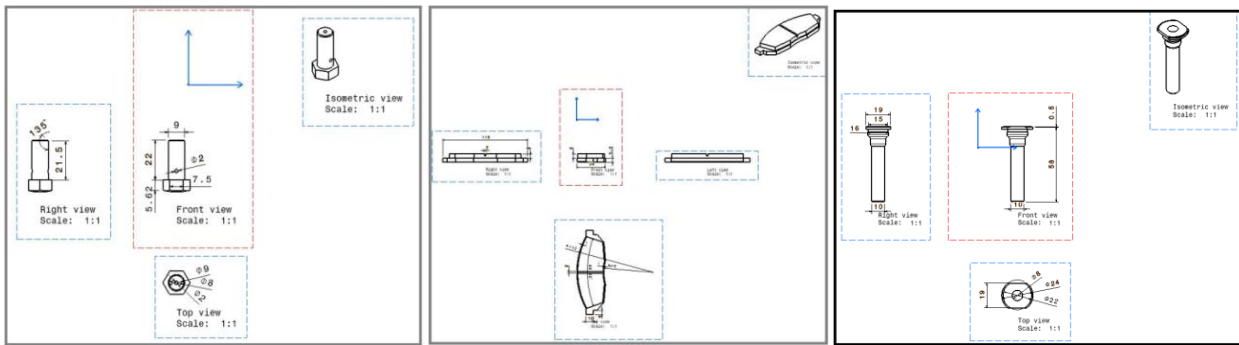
2D and isometric view of cylinder bolt, pad and taper bolt
